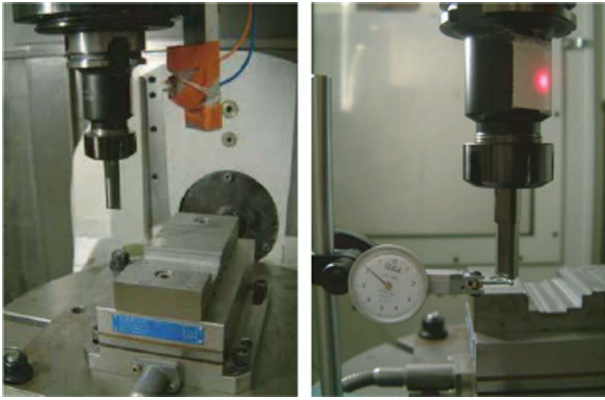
Experimental setup showing the straight-flute endmill held in a collet chuck and mounted on the vertical spindle, the laser tachometer, and the workpiece mounted on the dynamometer that is held on the machine table. The setup for radial runout measurement using the dial indicator is also shown.
